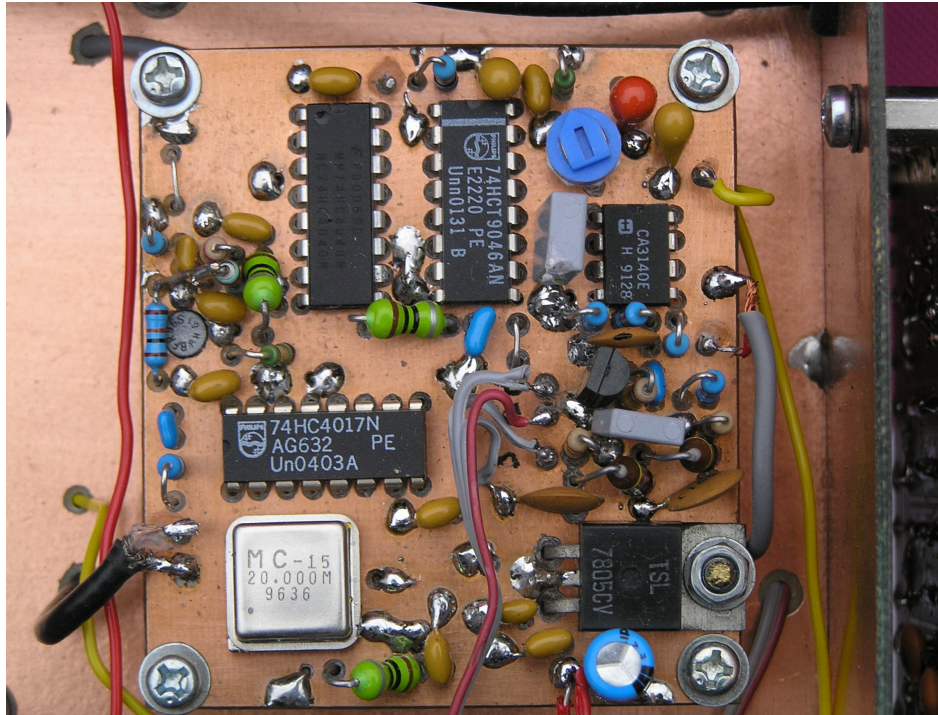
PLL board: SMD ICs are fitted on the trackside of PCB
